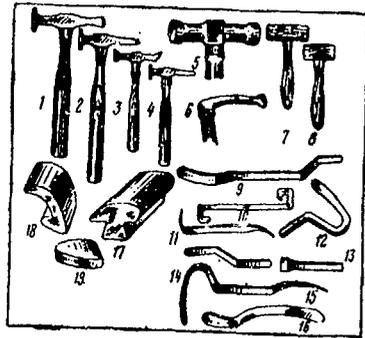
GARO Model 2146-1 Tool Set for Repair of Dents in Cabins and Fenders: 1-6, hammers; 7 and 8, mallets; 9-16, straighteners; 17, 18, 19, supports
